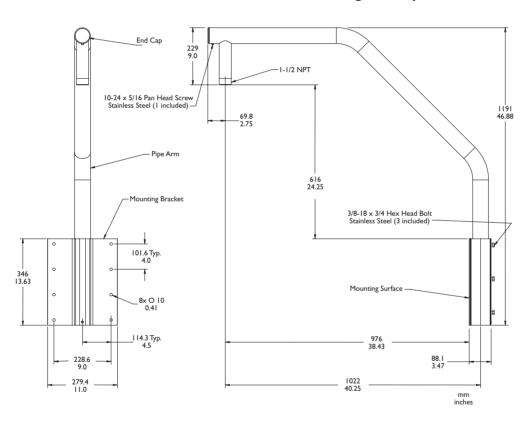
Dimensional Outline - LTC 9230/00 Parapet Mount Shown With Included Wall Mount Bracket
